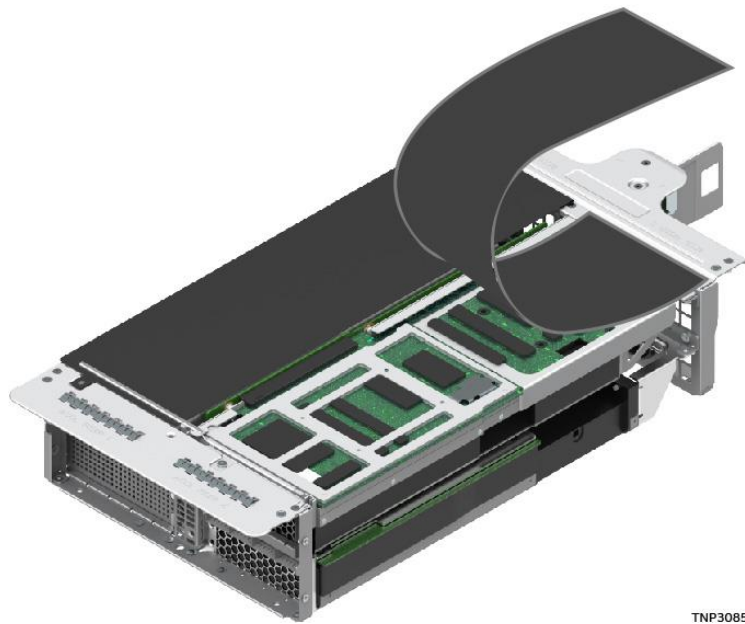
Lifting the Flap up on the Front Side of the Riser Assembly
